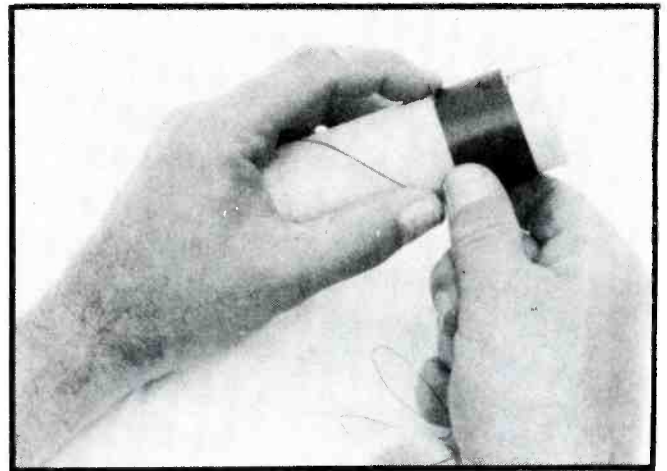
Winding the coil by feeding coil wire with right thumb, while turning coil form with left hand.
